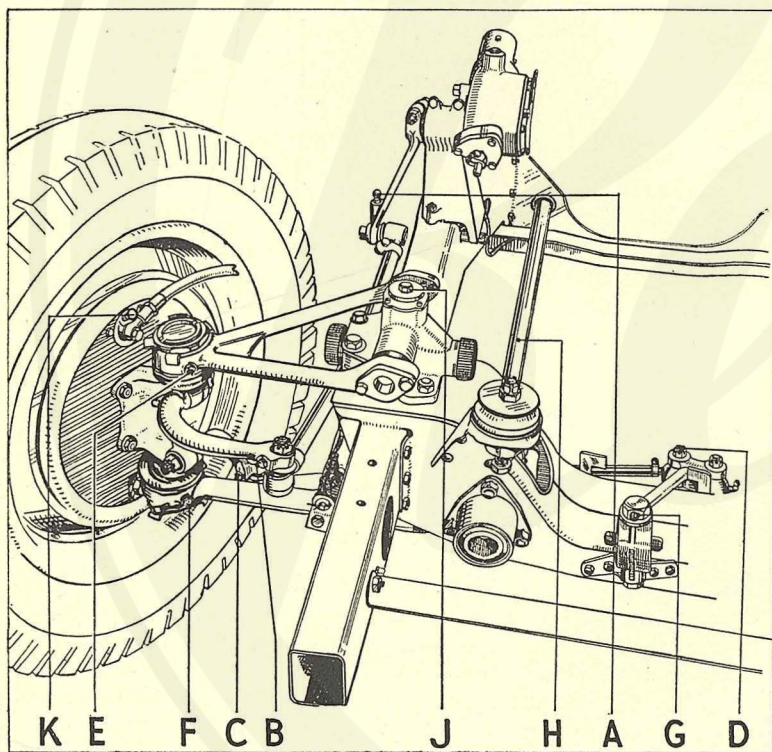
Front suspension. A, grease nipple for steering drop arm ball pin; B, steering lever ball pin; C, offside outer track rod ball pin; D, offside inner track rod ball pin; E, top swivel bearing; F, bottom swivel bearing; G, centre bracket pin; H, torsion bar; J, hydraulic damper filling plug; K, bleed valve.
